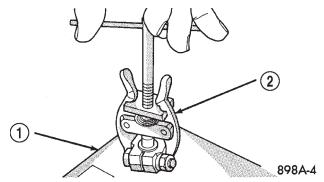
Remove Battery Cable Terminal Clamp - Typical
